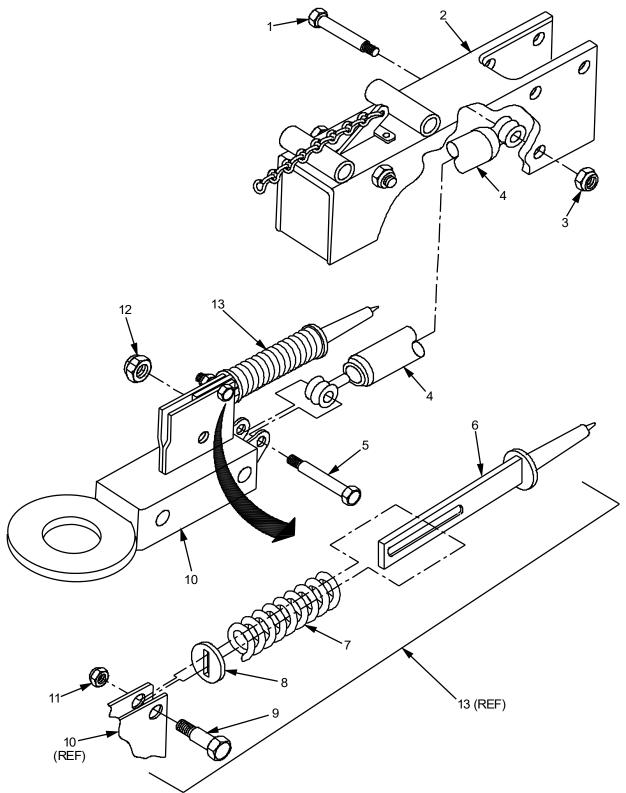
Brake Actuator Shock Absorber and Hydraulic Push Rod Removal/Replacement.
